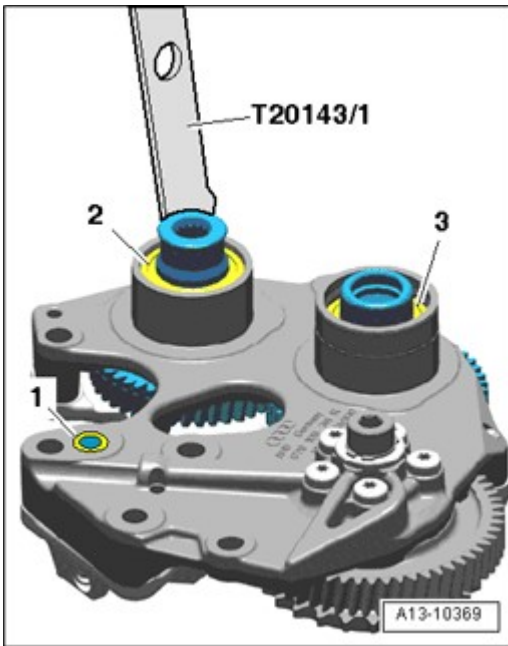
Removing A/C Compressor Drive Seal And Power Steering Pump Drive Seal Using Pulling Hook T20143/1
